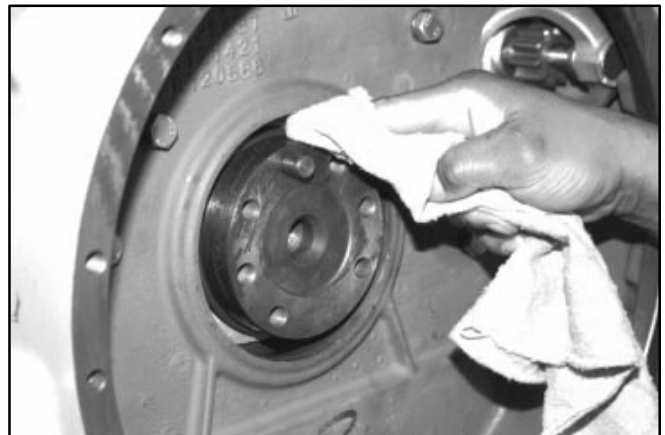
CLEANING CRANKSHAFT FLANGE AND FLYWHEEL HOUSING BORE
